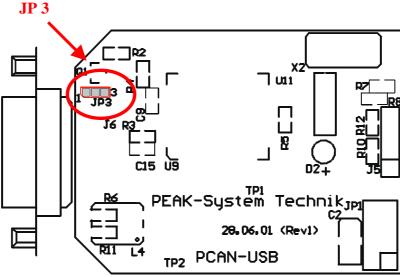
Jumper position at the PCB for Art.No: IPEH-002021
